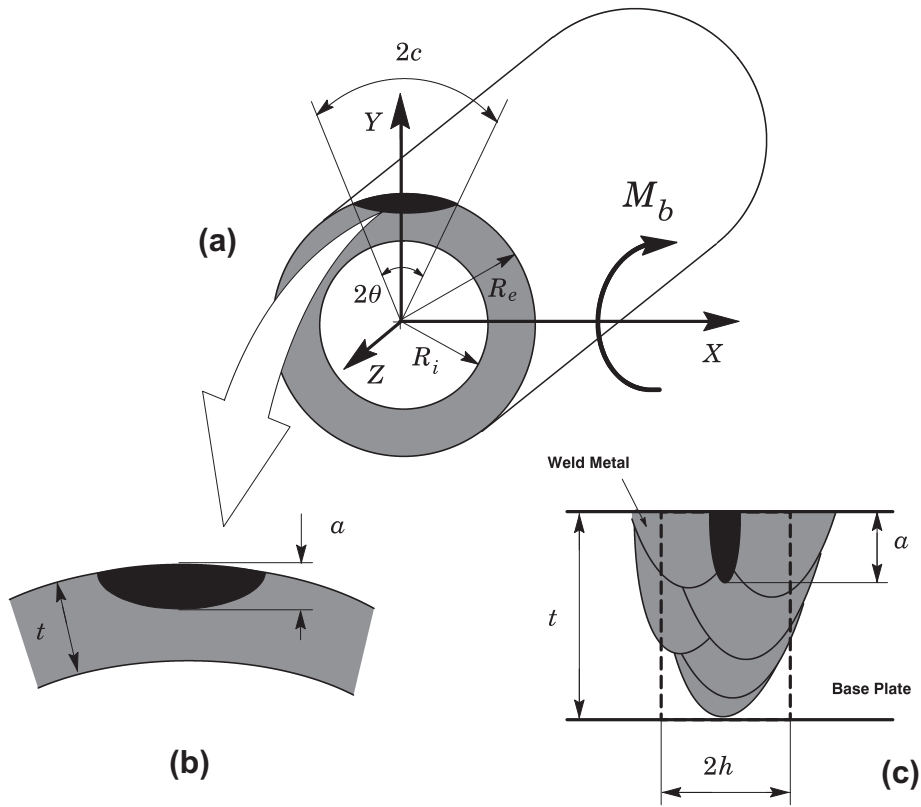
Circumferentially cracked pipe under bending and weld centerline defect geometry.
